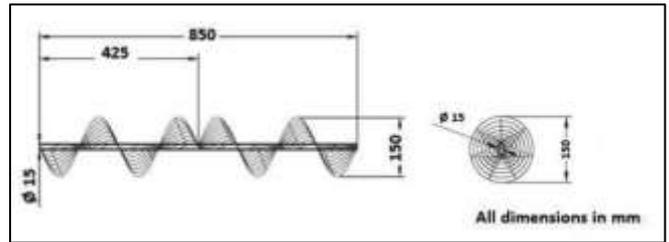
Schematic view of continuous spiral type auger (A₁)
